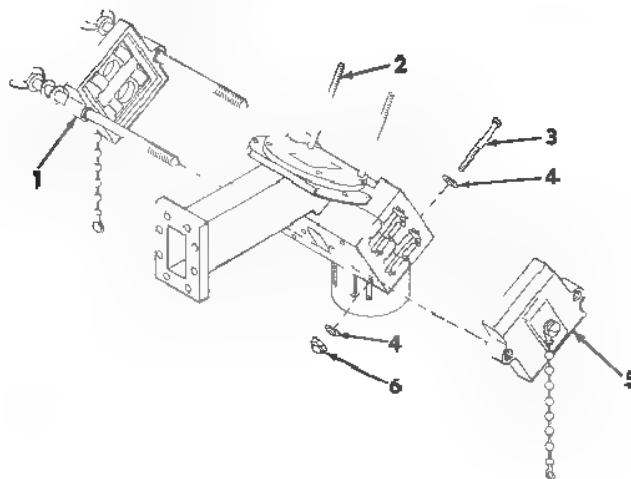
ATTENUATOR, VARIABLE /9991587/-EXPLODED VIEW
